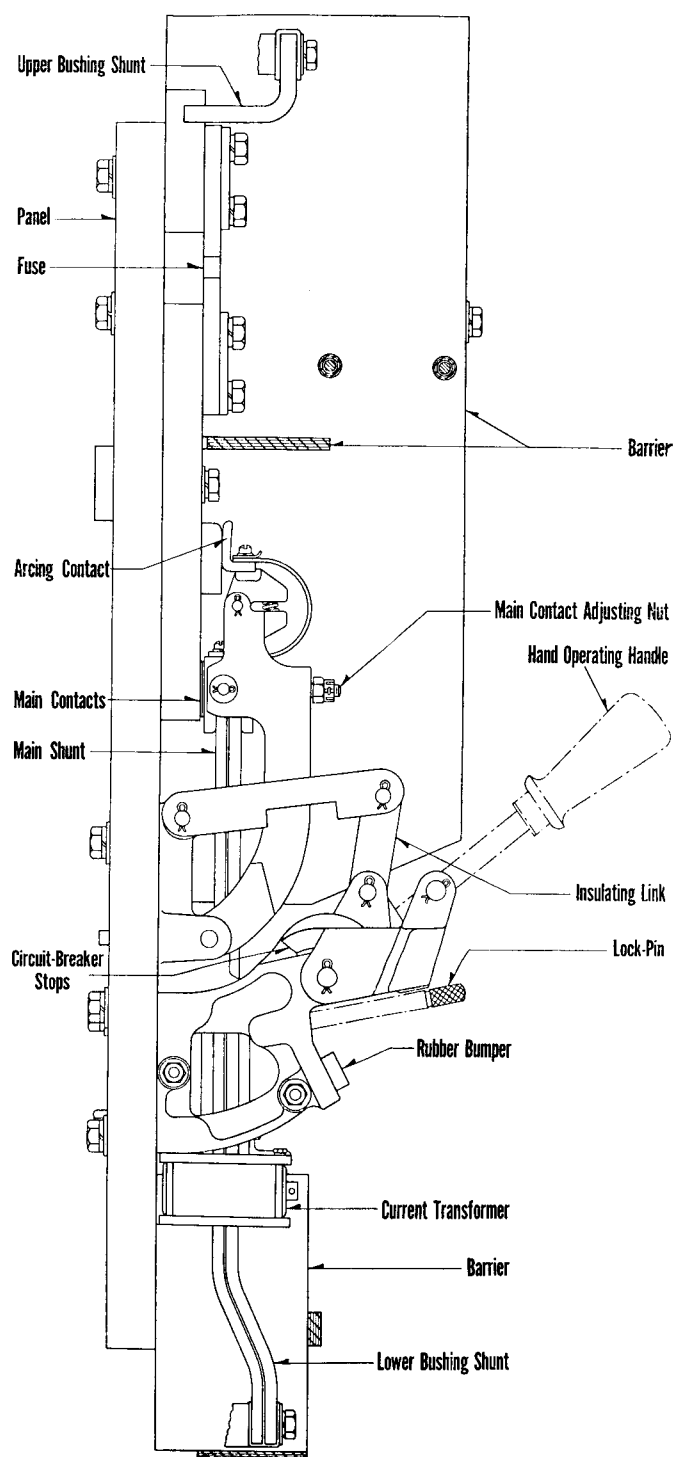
1200 AMPERE CIRCUIT-BREAKER—FOR PORCELAIN BUSHING HOUSING—SIDE VIEW
